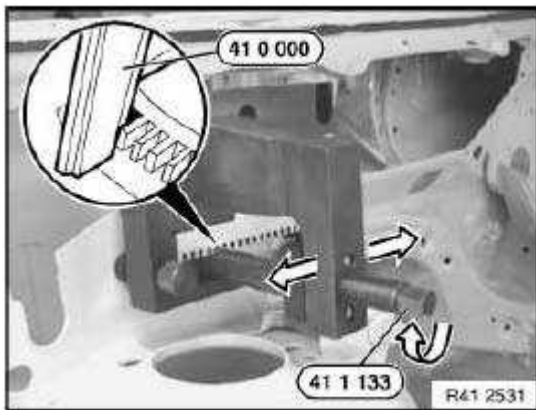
Special Tool (41 0 000 And 41 1 133)
